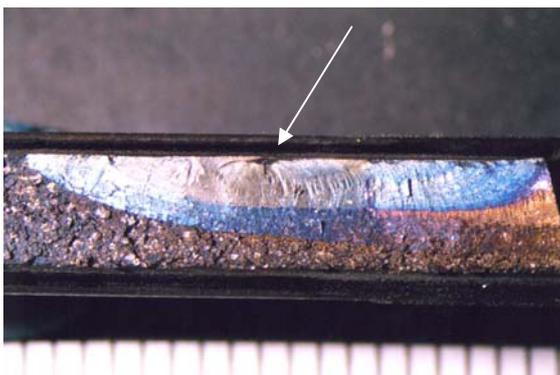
(Left). Blade fracture surface following cleaning – area of fatigue progression markings clearly visible. Fatigue origin indicated at arrow.
